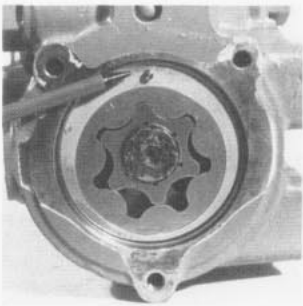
Orienting Gerotor Ring and Pin (CW) (Earlier Units Shown)
